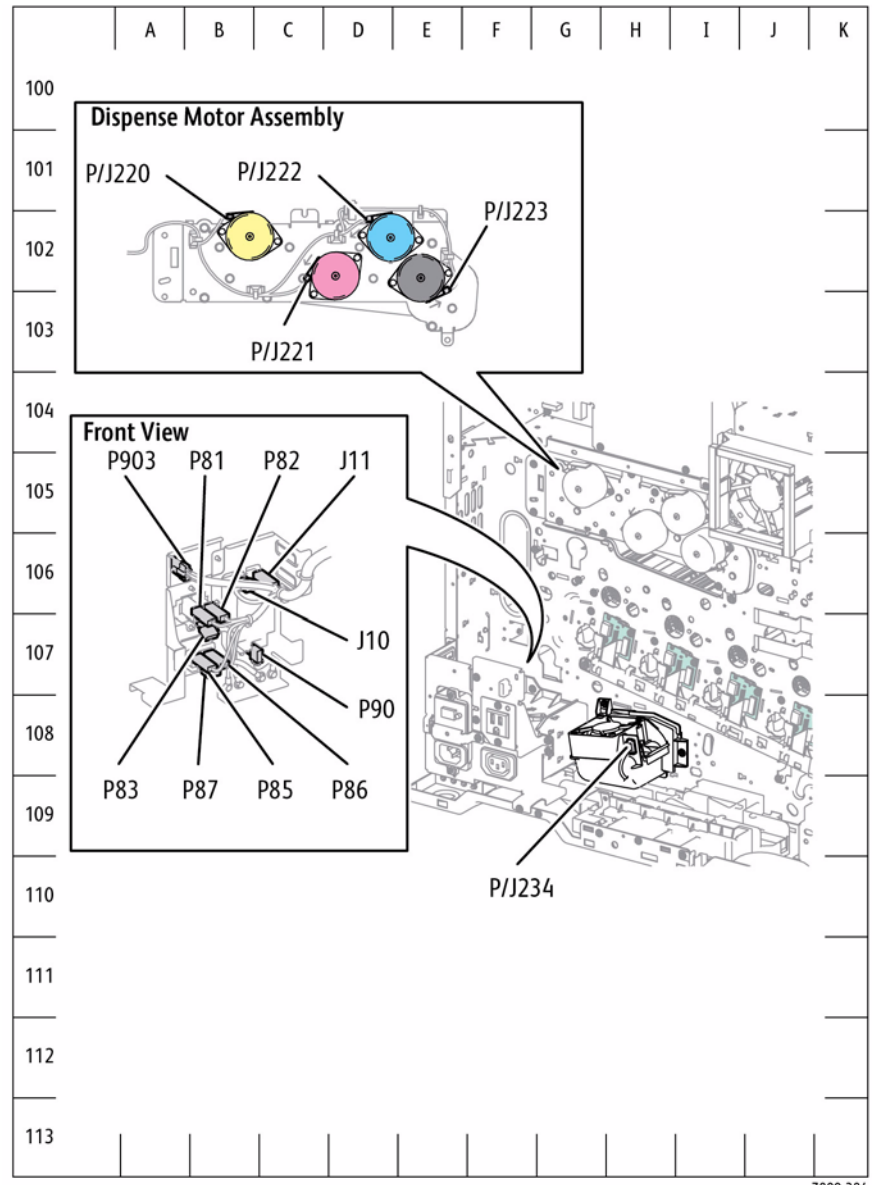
Toner Dispense Motor (Y/M/C/K), GFI Chassis, Bottom Fan
